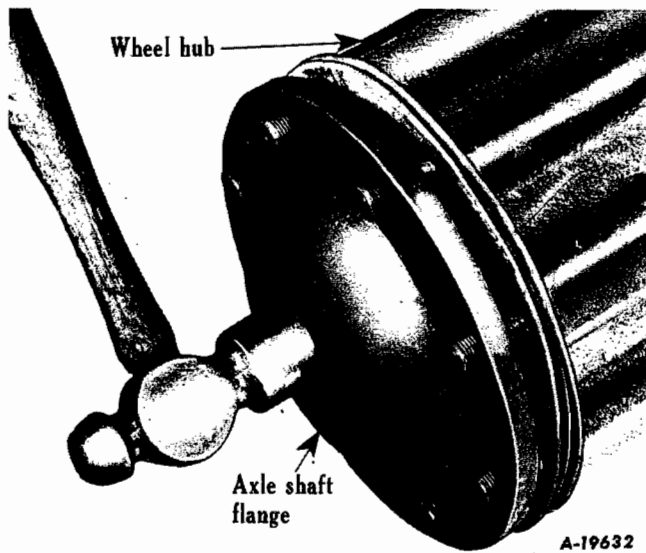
Push the axle shaft flange back into position against the wheel hub, and again, strike a sharp blow in the center of the axle shaft flange. This will cause the axle shaft to spring away from the wheel hub and allow removal of the axle shaft without resorting to the use of a pry bar or screwdriver. Do not pry between the axle shaft flange and wheel hub. To do so is apt to damage the seal assembly or machined surfaces of the wheel hub or axle shaft flange.
